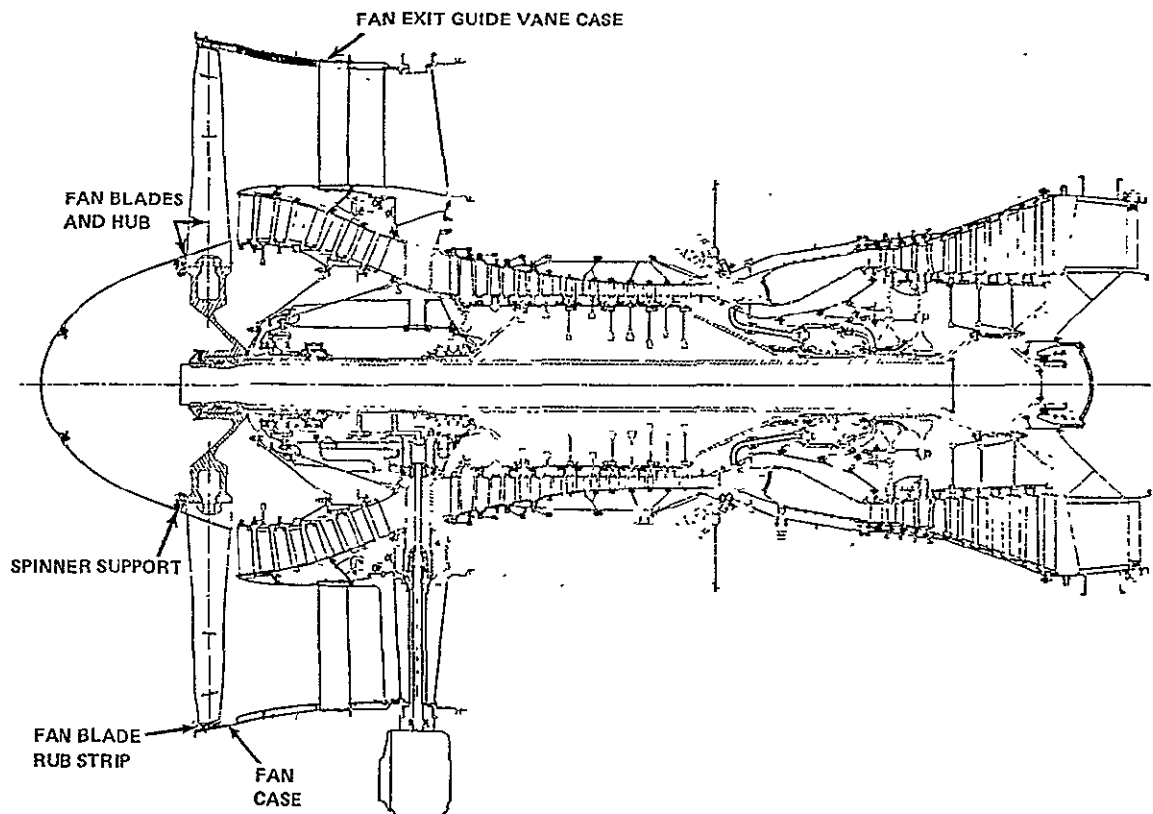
JT9D-70/59 Parts Affected by Fan Blade Change
